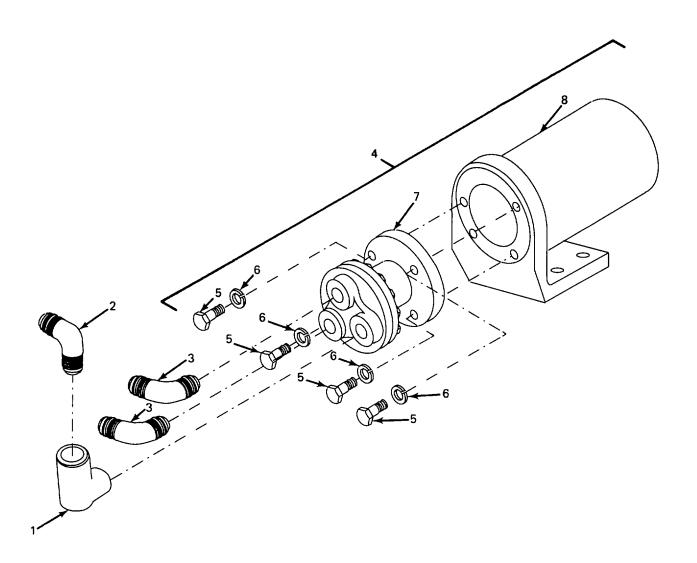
PUMP ASSEMBLY (92-0011)
